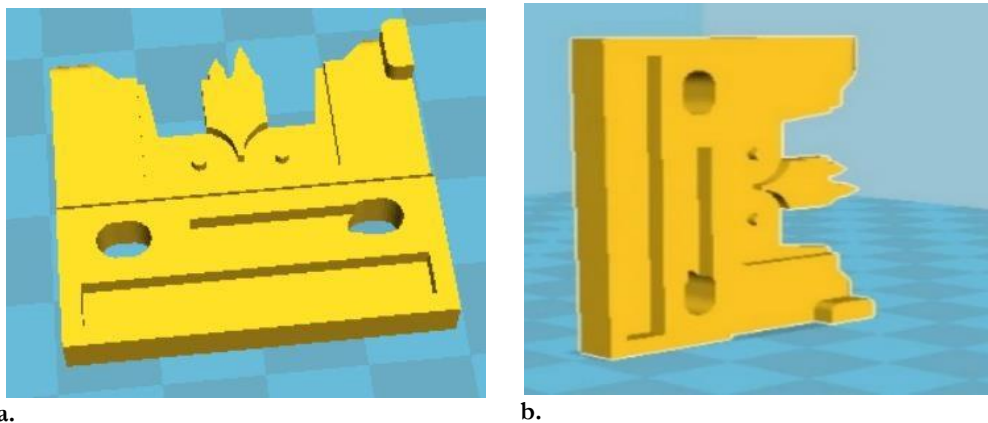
Printing bottom contact surface of the parts clip body: a. back side down; b. side down.
